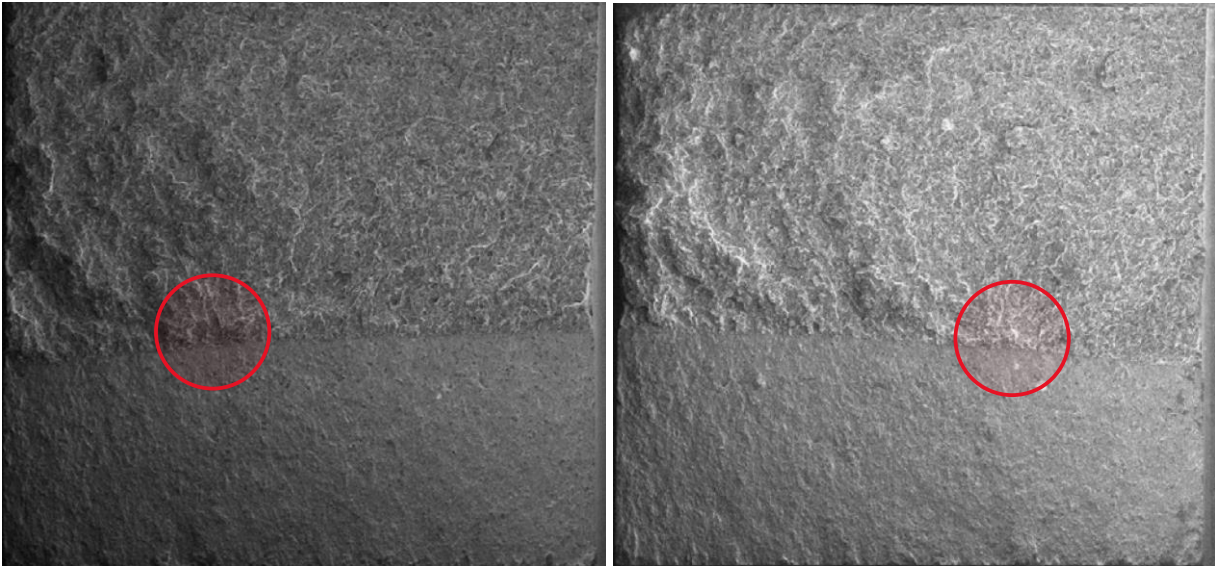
Left and right fracture surface of irradiated SE(B) specimen C8C, manufactured from a WOL specimen, showing predominantly cleavage fracture. The specimen was tested at 25°C and the fracture toughness was $K_{Ic} = 71 \text{ MPa}\sqrt{\text{m}}$. The primary cleavage fracture initiation region is marked by a red circle. The fracture surface contains some MnS inclusions located close to the fatigue crack tip, but primary cleavage initiation does not seem to be connected to MnS inclusions. The fatigue surface contains patches of intergranular fracture, but intergranular fracture is not visible in the cleavage fracture region.
